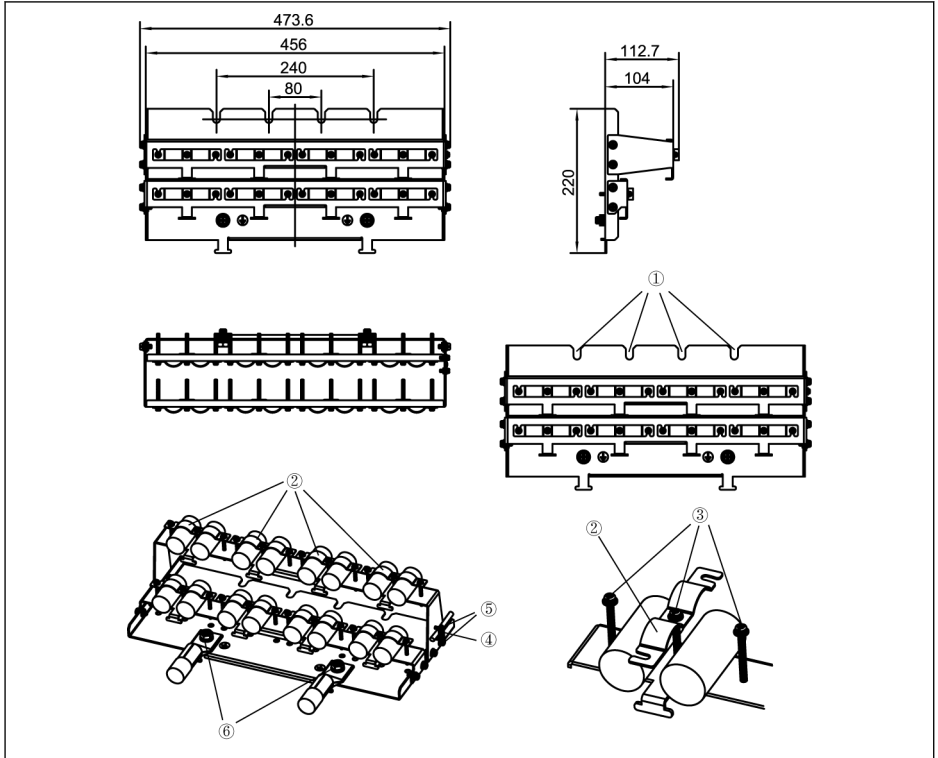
Shielded cable connection with accessories for L housing (FEAM03.2-006-NN-NNNN)
